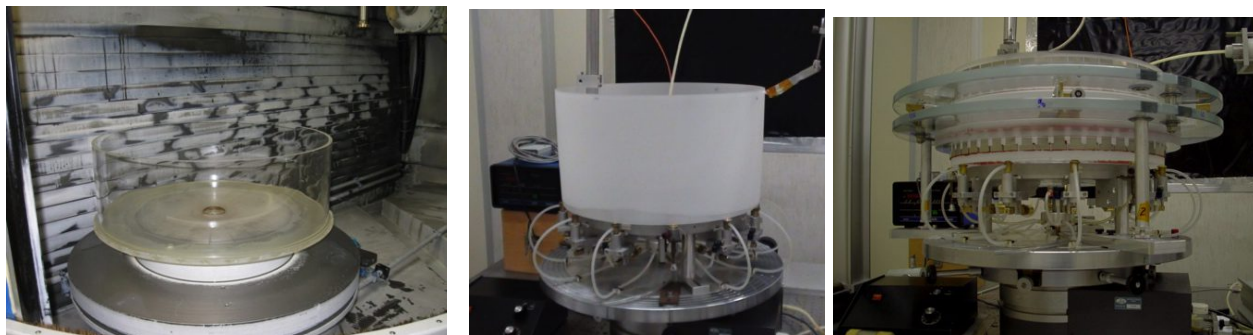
(Left) A cylindrical tube of fused silica before the grinding to generate a double conical configuration. (Center) The shell after the raw grinding ready to be integrated in to the SSS. (Right) A astatic equipment is used to support the shell during the fixation to the Shell Support System (SSS).
